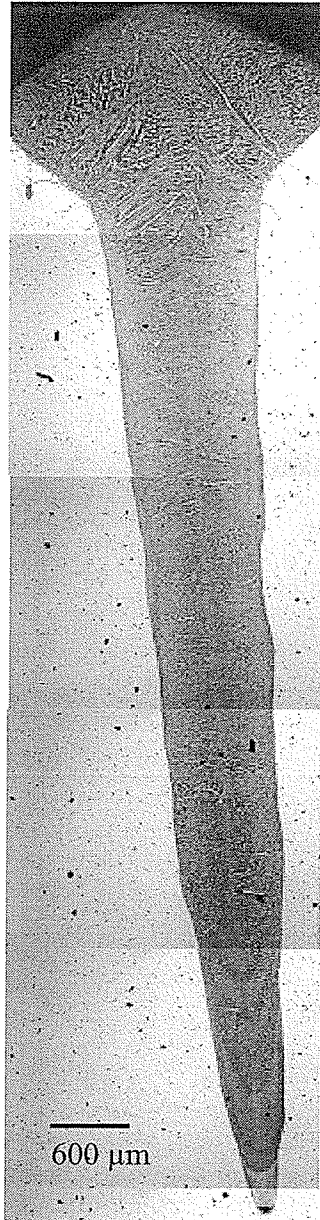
Nail head shape weld profile obtained after EB welding of Inconel 718
